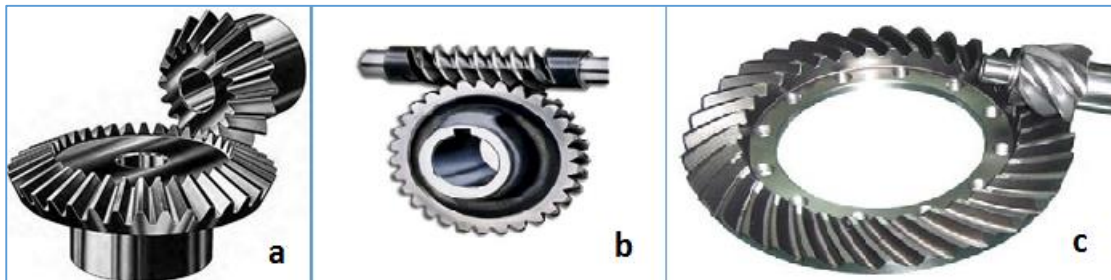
a-Bevel Gears, b- Worm Gear, c- Hypoid Gears
